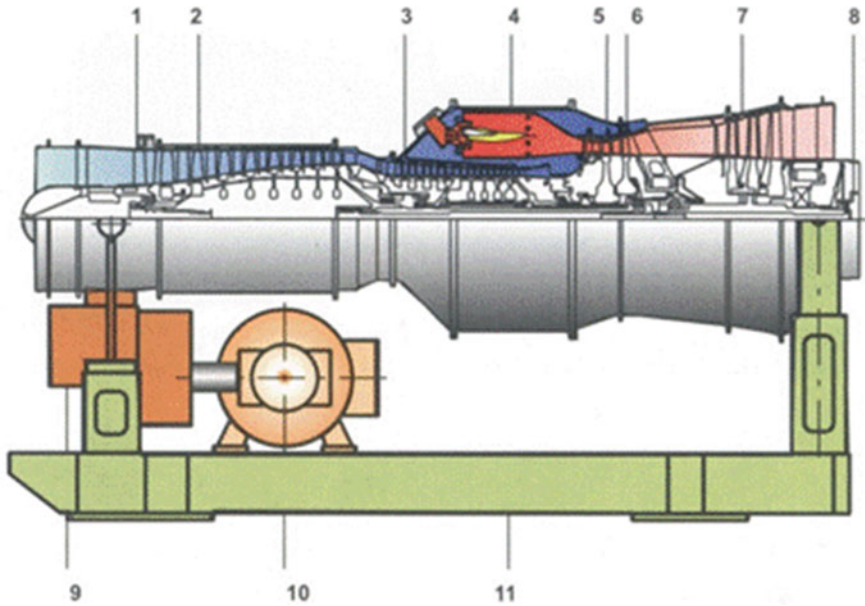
The layout of the UGT 3000 1—inlet guide vanes; 2—low pressure compressor; 3—high pressure compressor; 4—combustion chamber; 5—high pressure turbine; 6—low pressure turbine; 7—power turbine; 8—power take-off flange; 9—drive box; 10—electric starter; 11—frame
